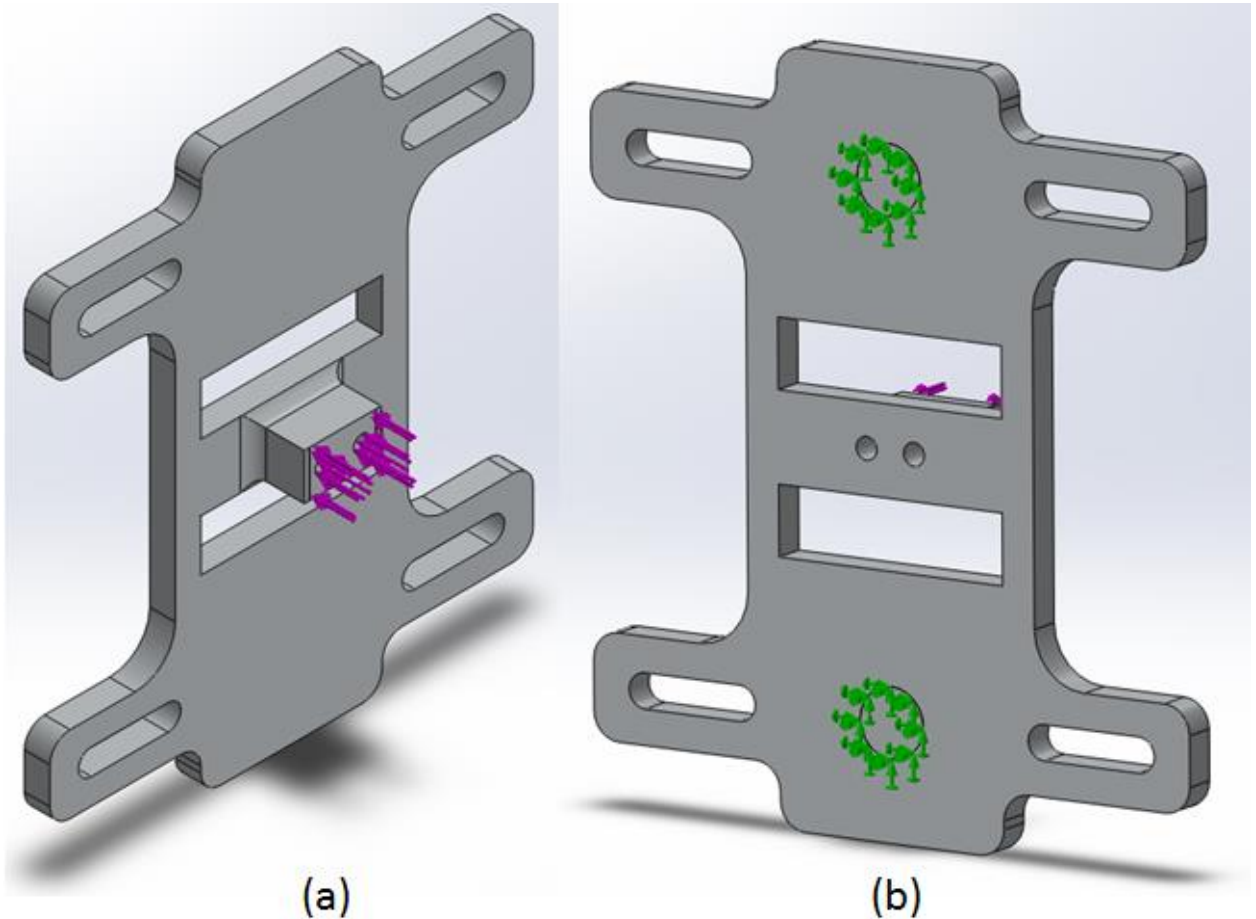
Anterior Fixture Front Plate Loading/ Fixture Conditions – Part (a) shows a front isometric view with the applied force while part (b) shows a back isometric view with the surface which was fixed.
